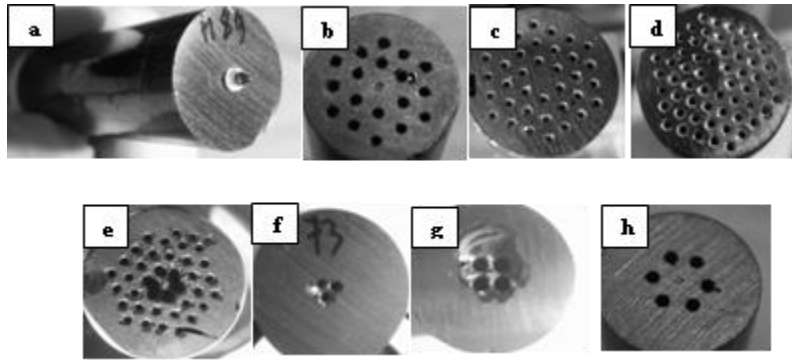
Pictures of 16 mm outer diameter preforms elaborated by mechanical drilling. Preform for core clad fiber (a: 1 hole); Preforms for microstructured fibers (b: 2 rings/18 holes; c: 3 rings/36 holes; d: 4 rings/64 holes; e: 3 rings/34 holes + 2 big holes); Preforms for suspended core fibers (f: 3 holes, g: 4 holes, h: 6 holes).
